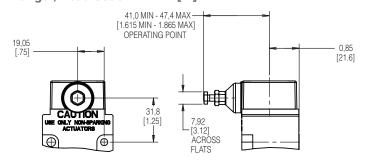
MICRO SWITCH BX2 Series Side Rotary Product Dimensions • mm [in] Side Rotary - Head Codes: A, P, AND R
